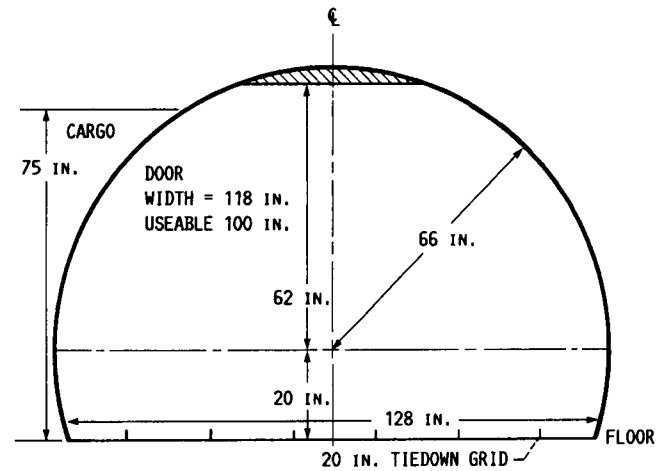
ZONE A CROSS SECTION LOOKING FORWARD IN KC-135.
